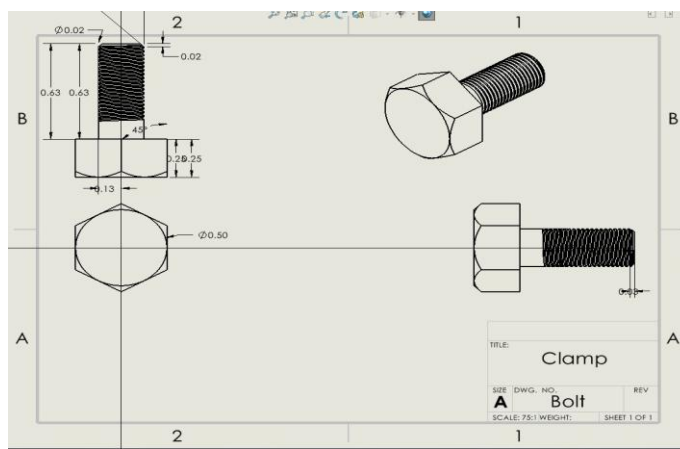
3D dimensioned drawing of bolts utilized in the clamp
